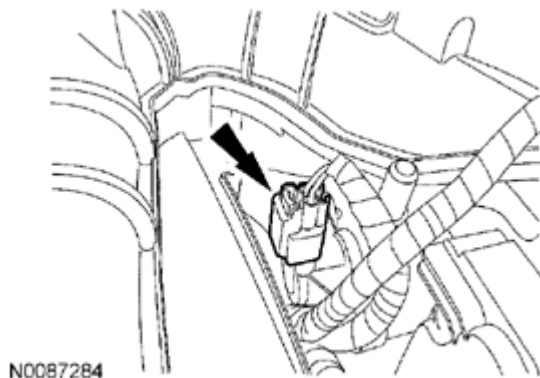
Locating Evaporative Emission Canister Purge Valve Electrical Connector
